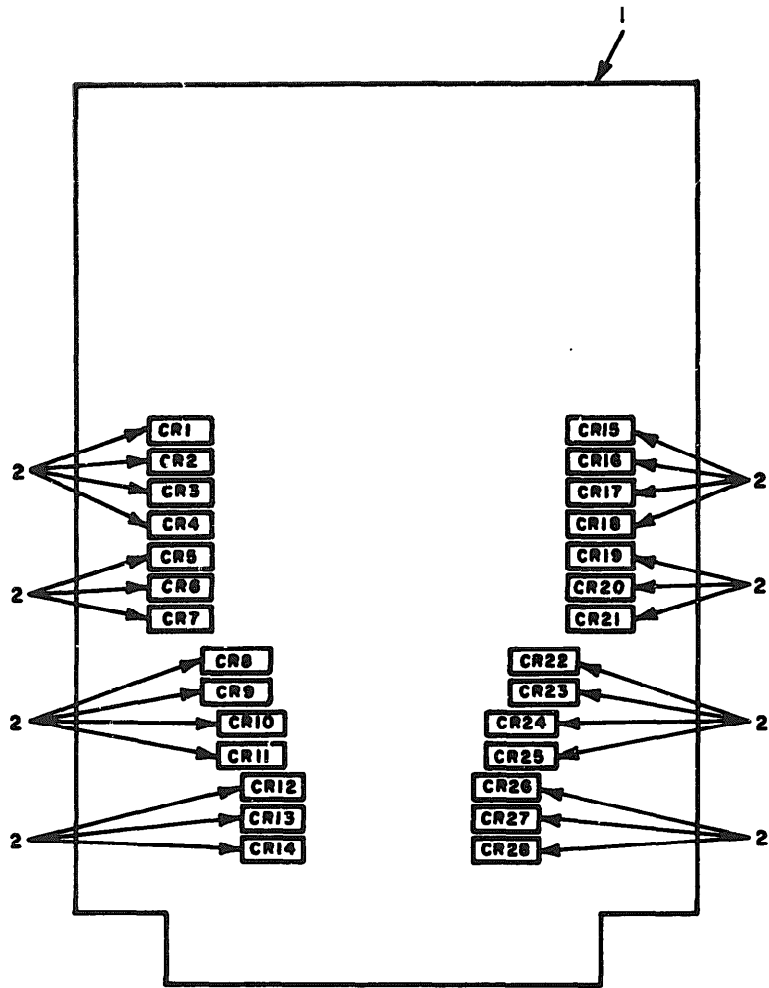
Circuit Card Assembly (IMLDA lamp driver) 398-6820-1.
